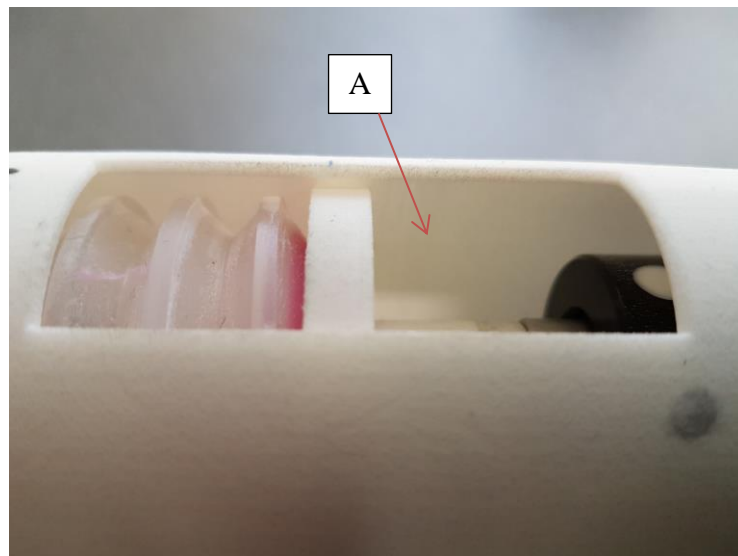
Assembled pneumatic cuff driver. (A) Cylindrical opening.
